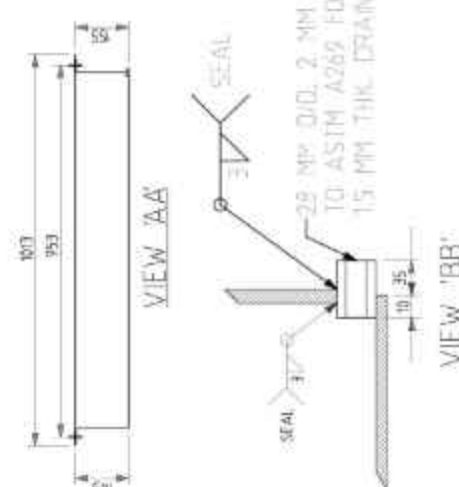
DETAIL OF ALIGNMENT MACHINE AND MOUNTING ARRANGEMENT
